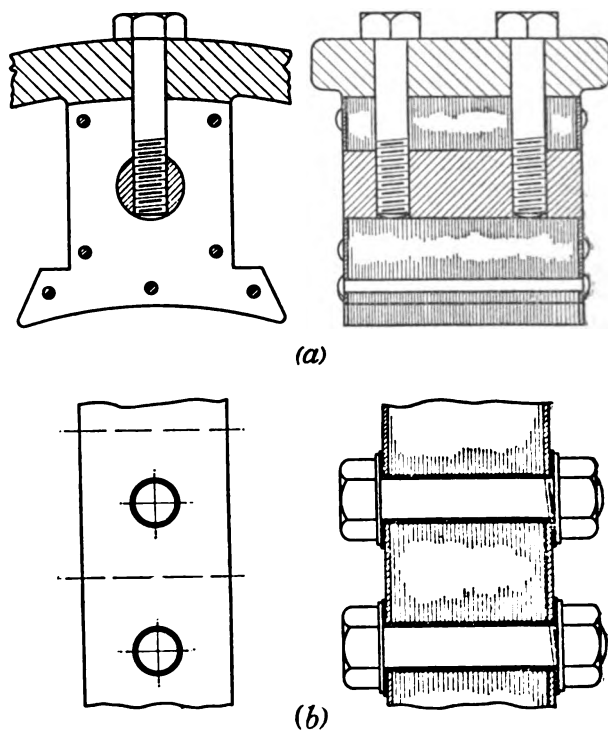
Diagram showing arrangement of steel fixing-piece in a pole-core, and of insulated bolts in a transformer limb.
